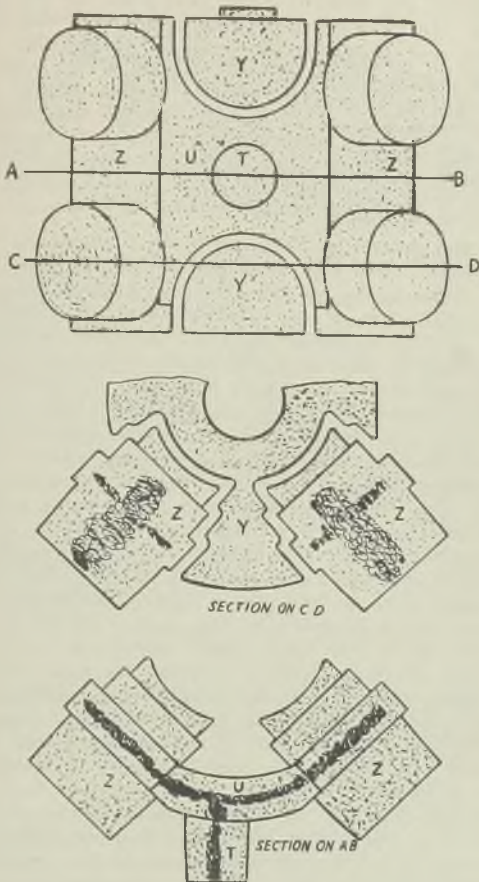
SECTIONS OF ASSEMBLED CORES FOR
